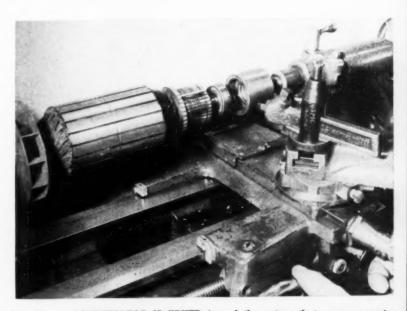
COMMUTATOR IS TRUED in a lathe set-up that uses as center rotor bearing, instead of shaft center.
